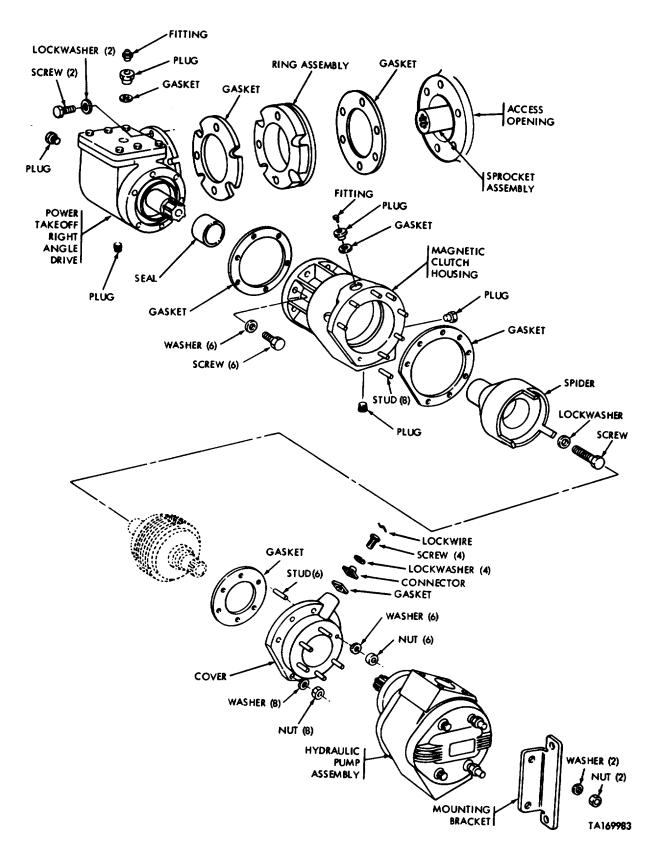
Disassembly or assembly of power takeoff assembly right-angle drive, magnetic clutch, and hydraulic pump assembly.
